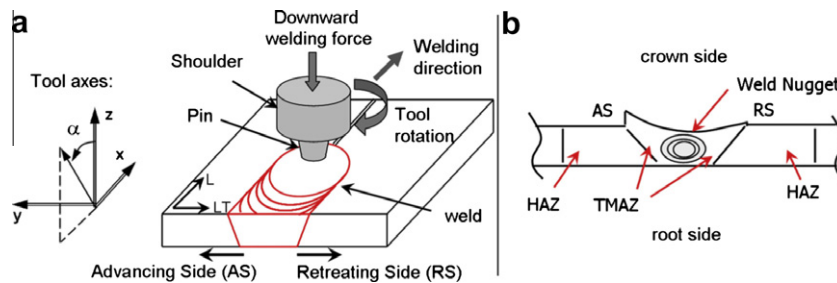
(a) FS weld tool and definition of axes and (b) definition of weld zones.
